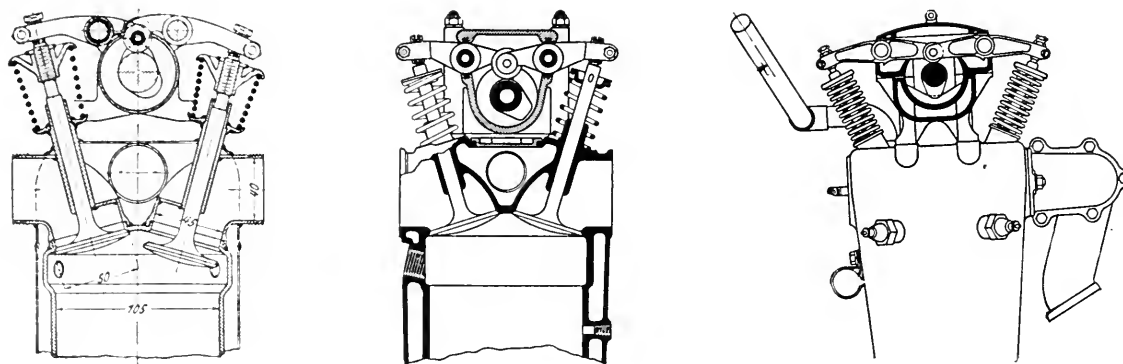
VALVE MECHANISM OF 3 TYPICAL "OVERHEAD CAMSHAFT" ENGINES. LEFT, MERCEDES; CENTER, HALL SCOTT; RIGHT, WISCONSIN
